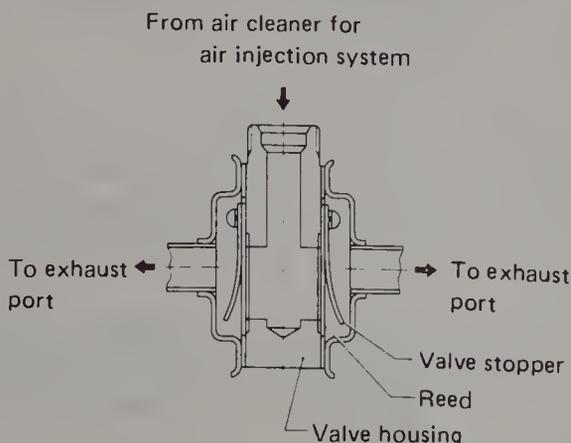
Air suction valve for air injection system (1980) (Sec 6)
